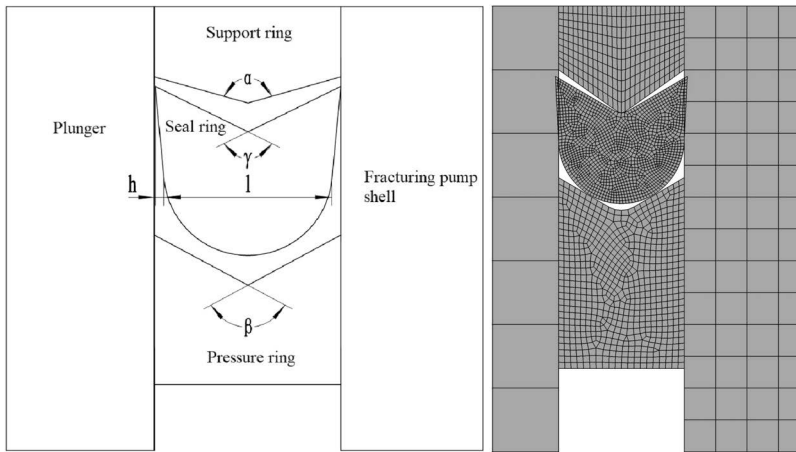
The sealing structure and numerical model of the fracturing pump.
